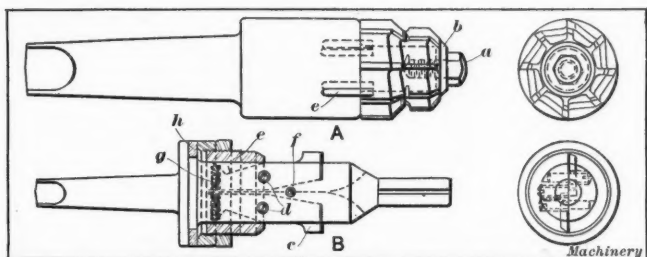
Step Reamer used for rough-boring Inlet Valve Chamber Seats and Special Recessing Tool for the Valve Seats
